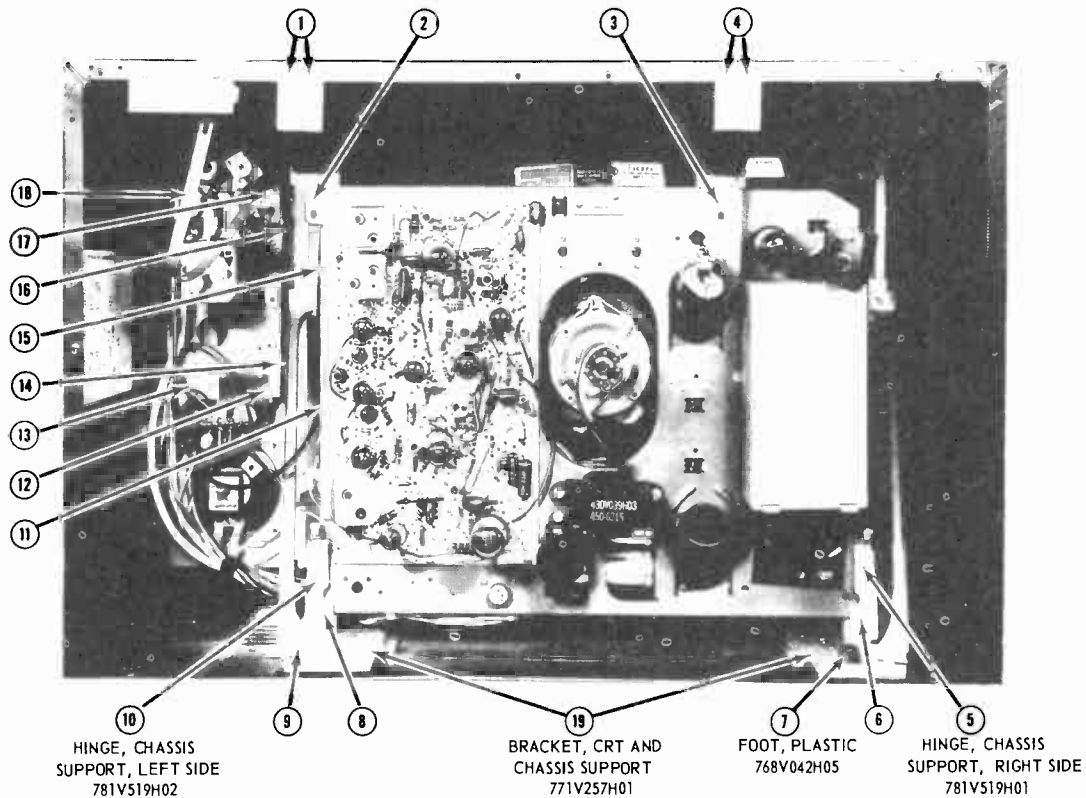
Rear View of Chassis Showing Location of Screws for Chassis Removal.
